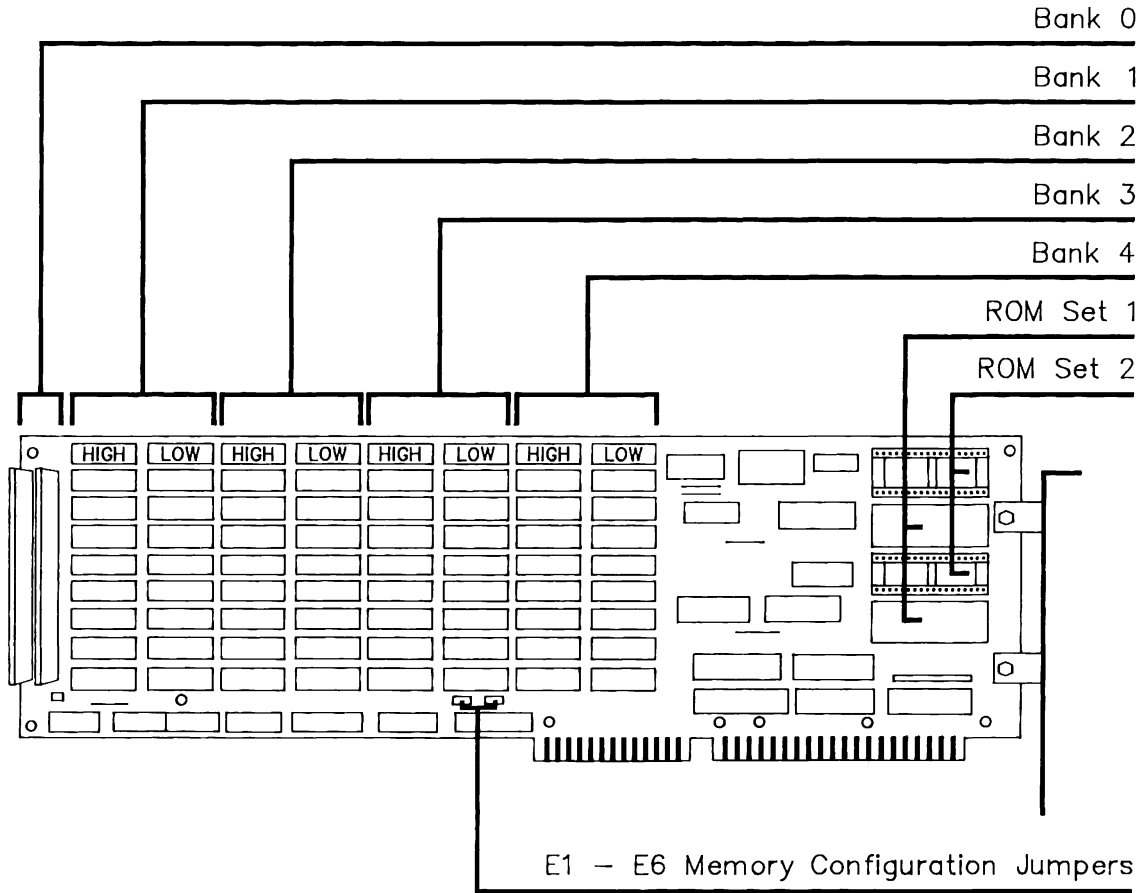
COMPAQ DESKPRO 286 System Memory Board Version 1 Component Layout
